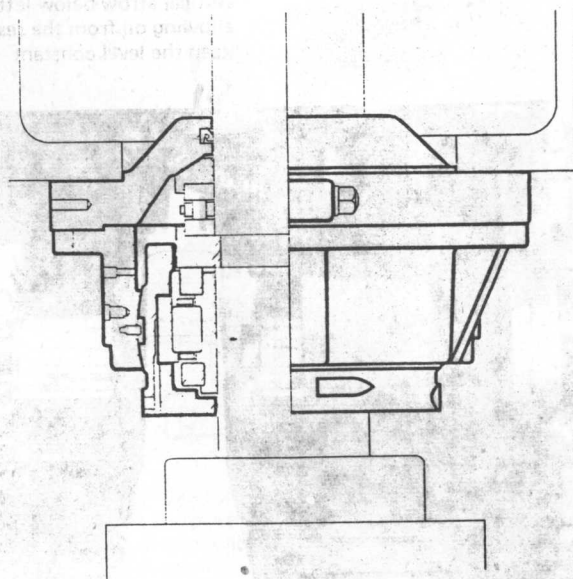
The axial load from the stirrer is taken by the 8 in split flat thrust bearing, lubricated through the bore of the stationary race, which fits into a shroud with a spherical seating for correct alignment. Note the single-lipped outer race of the split radial bearing to cater for any reverse thrust
